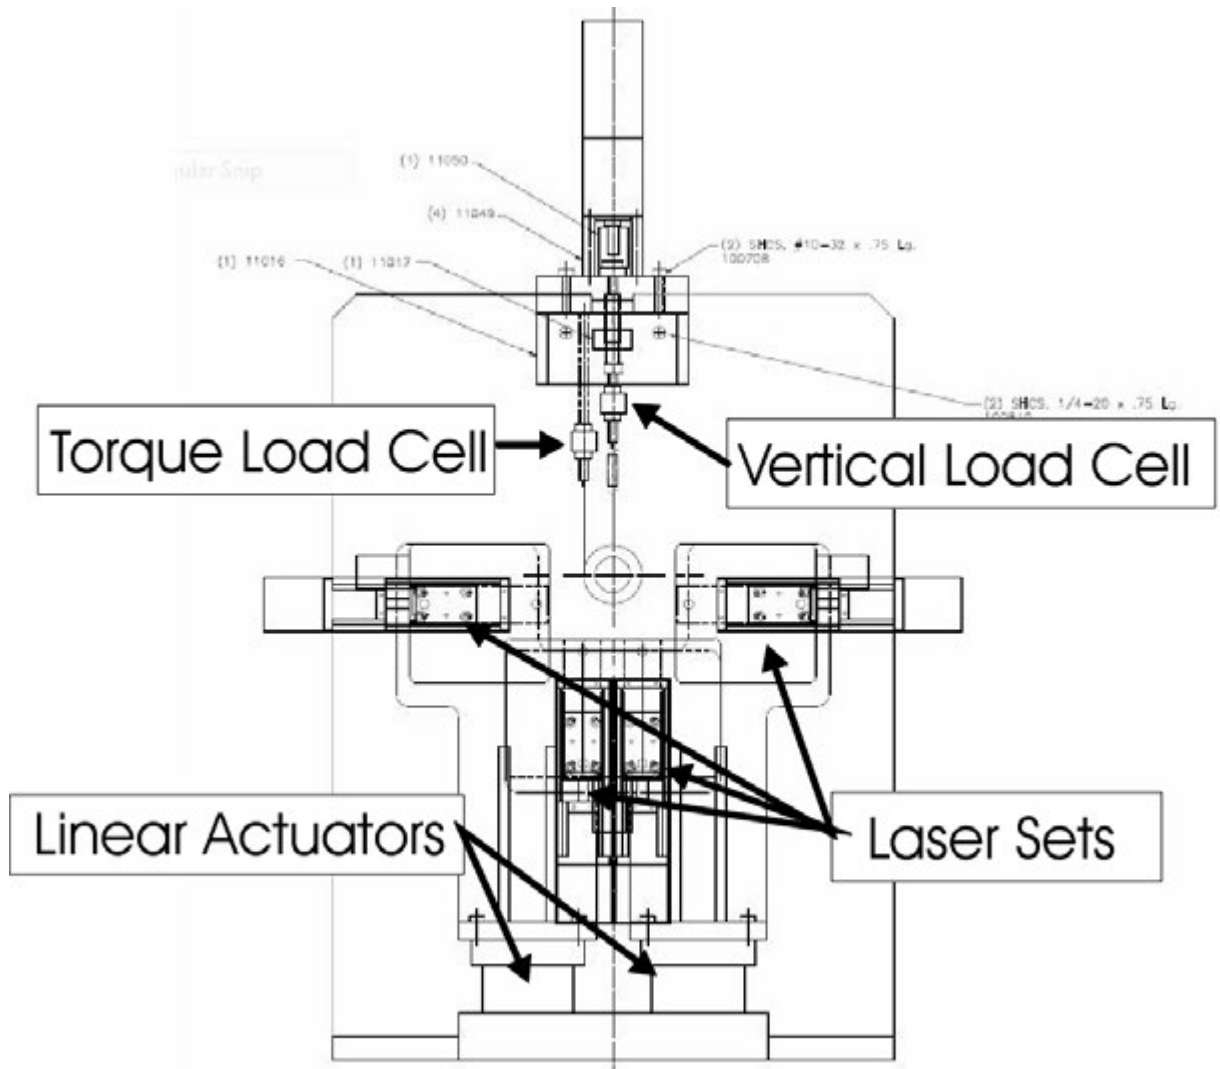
Assembly drawing showing a front view of the gas bearing/HSHT slip ring test stand.
